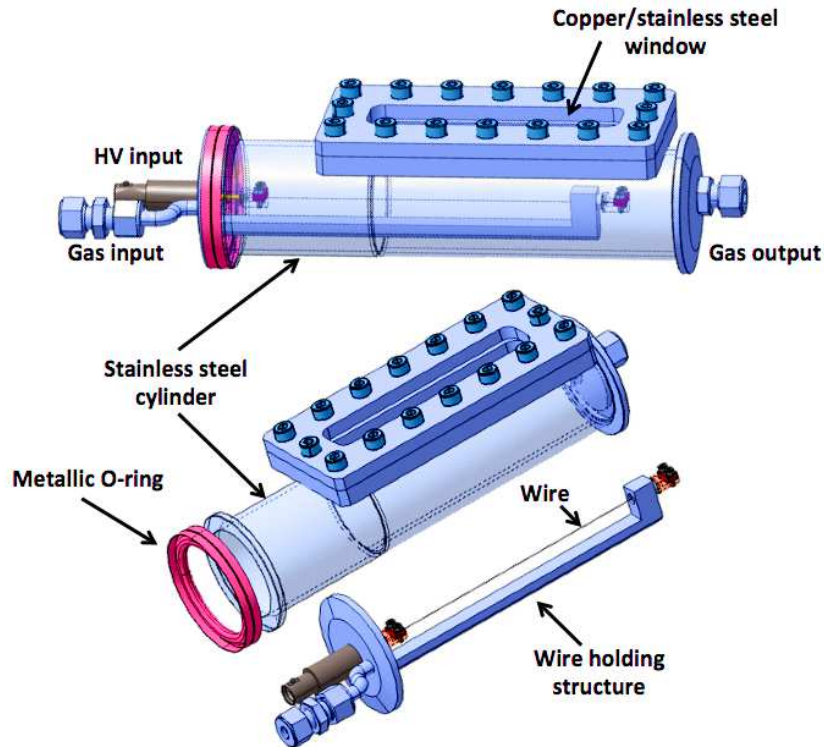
Technical design of the CMS GEM wire chamber showing the outer cylinder and the independent wire holding structure.
